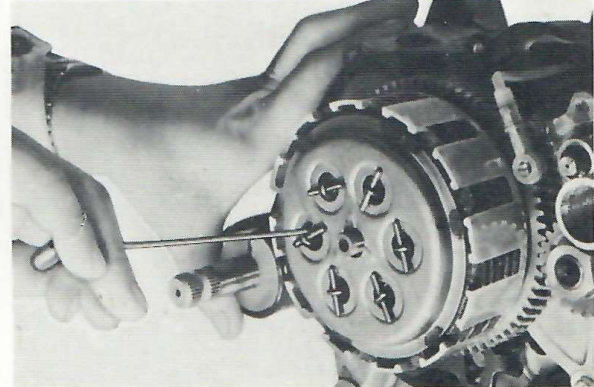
Taking off clutch spring pins with clutch spring hook (special tool No. 09920-20310)
